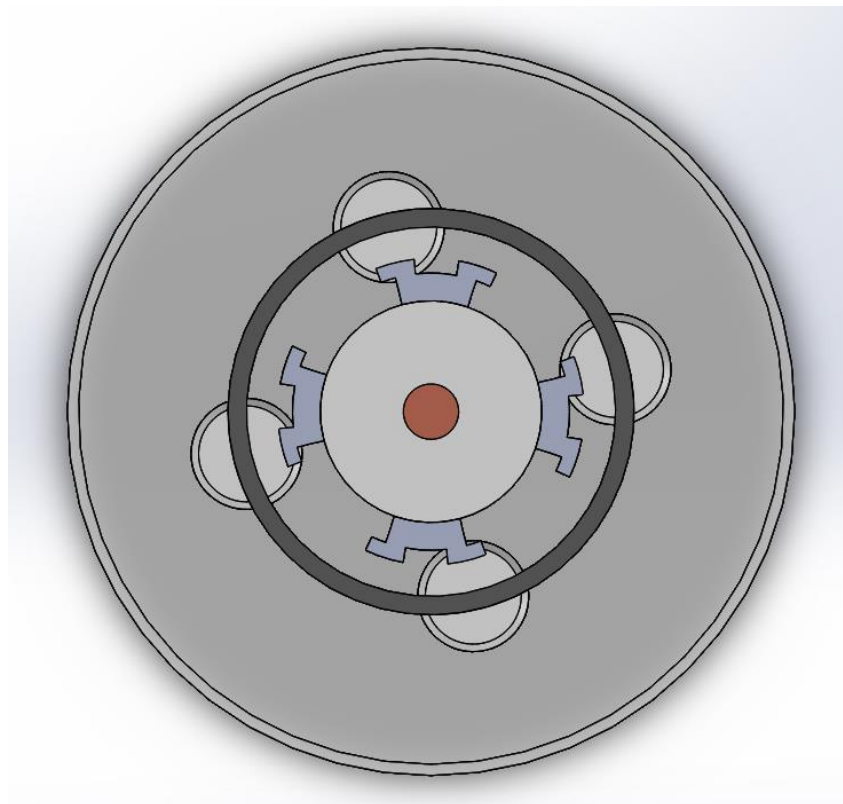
Top view of CAD drawing of the rotating cylinder electrode design.
